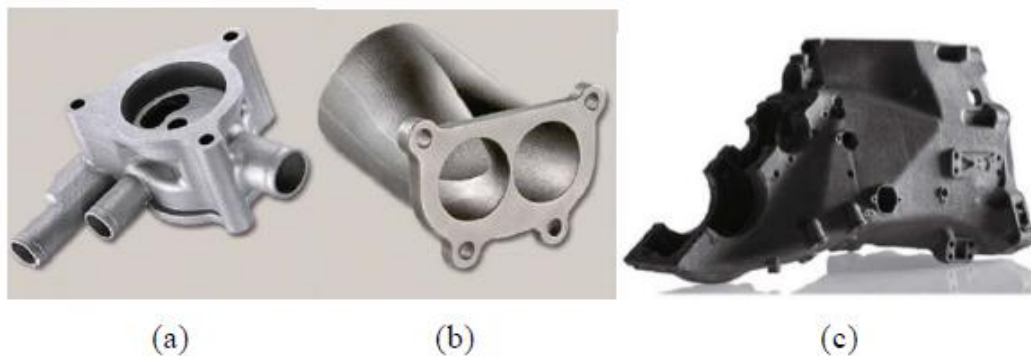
Automotive elements manufactured by AM technology [16]: (a) Oil pump housing produced by electron beam melting (EBM), (b) Race car gearbox produced by EBM, and (c) Exhaust manifold produced by SLM
